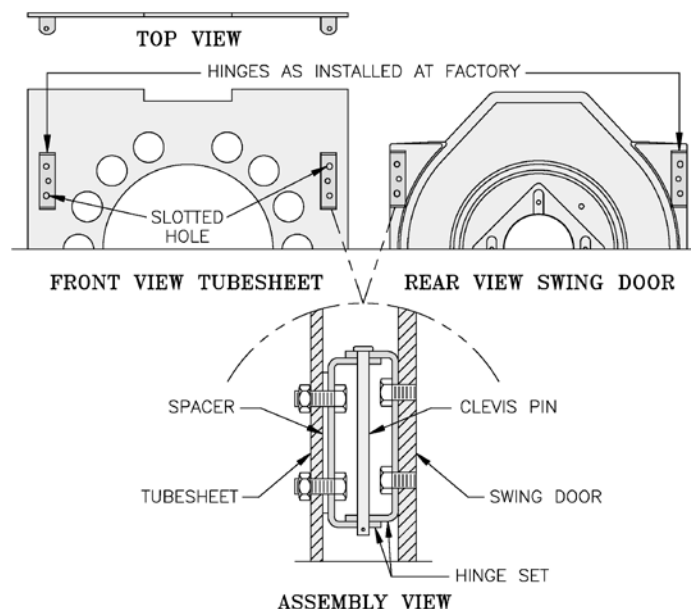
Hinge Installation & Assembly, microTEK3 Boiler
